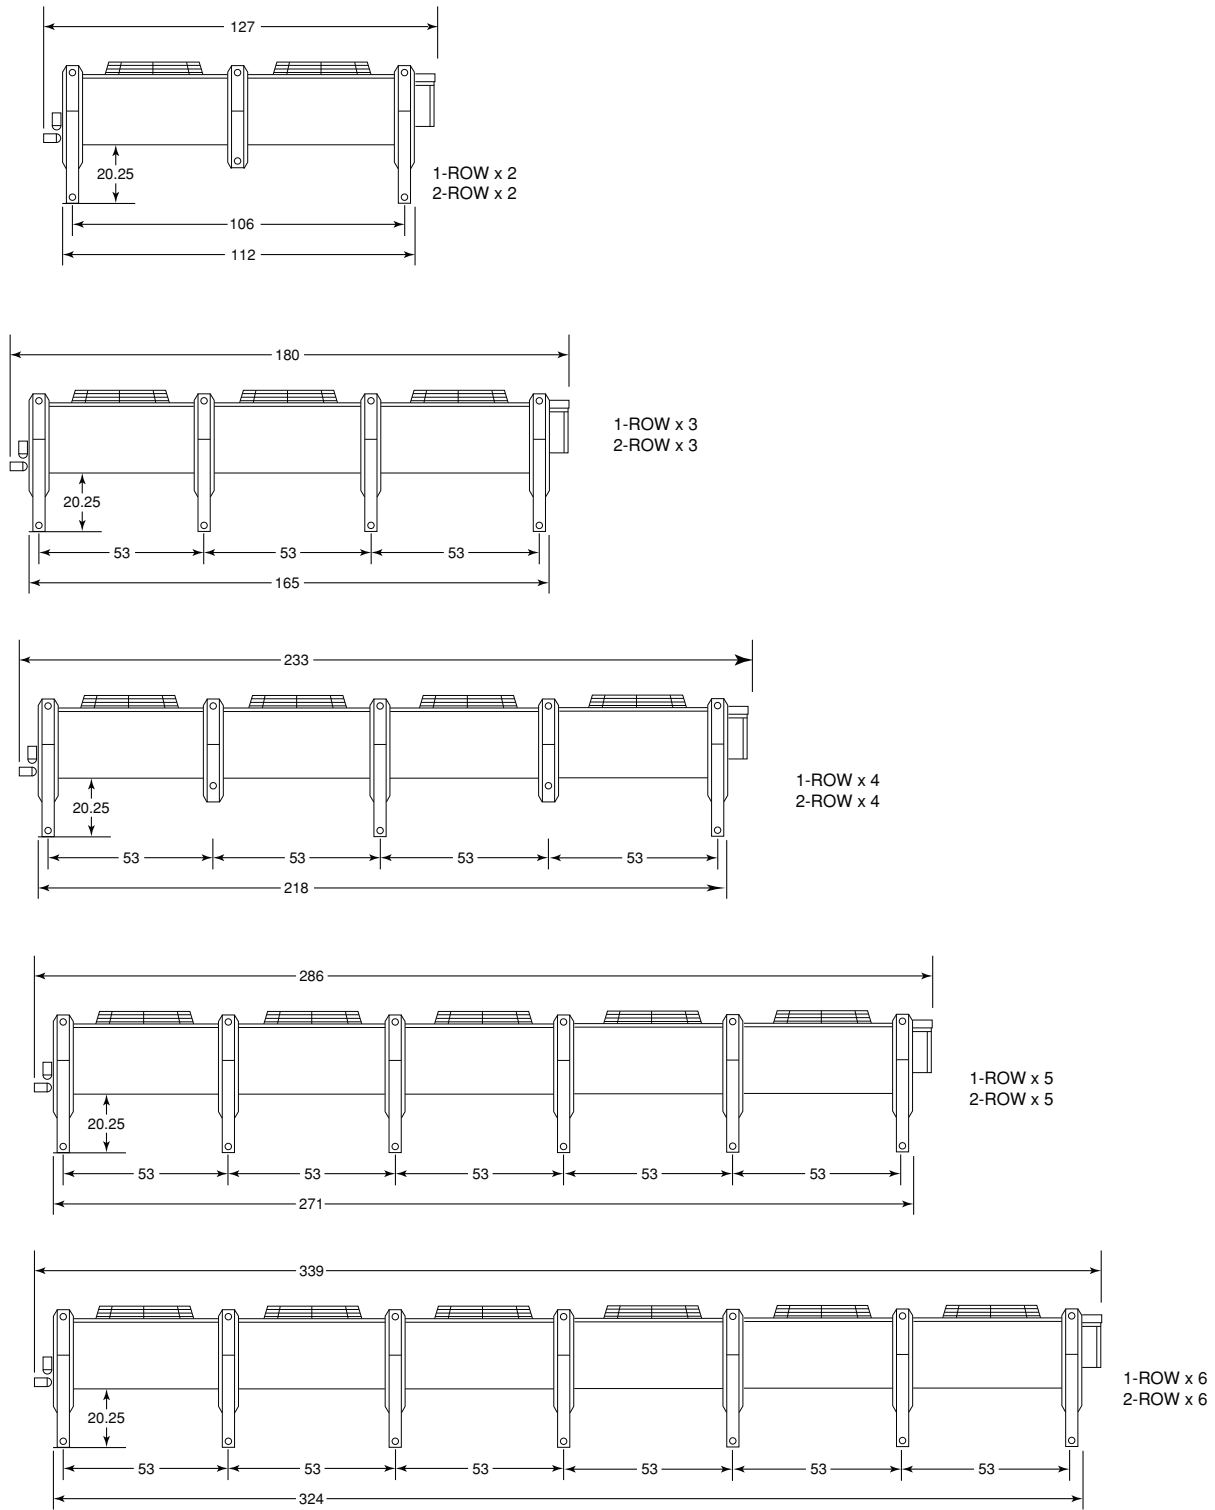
PoolPak Air Cooled Condenser Side views
